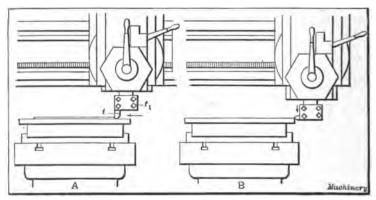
(A) Turning a Flat Surface. (B) Turning a Cylindrical Surface
